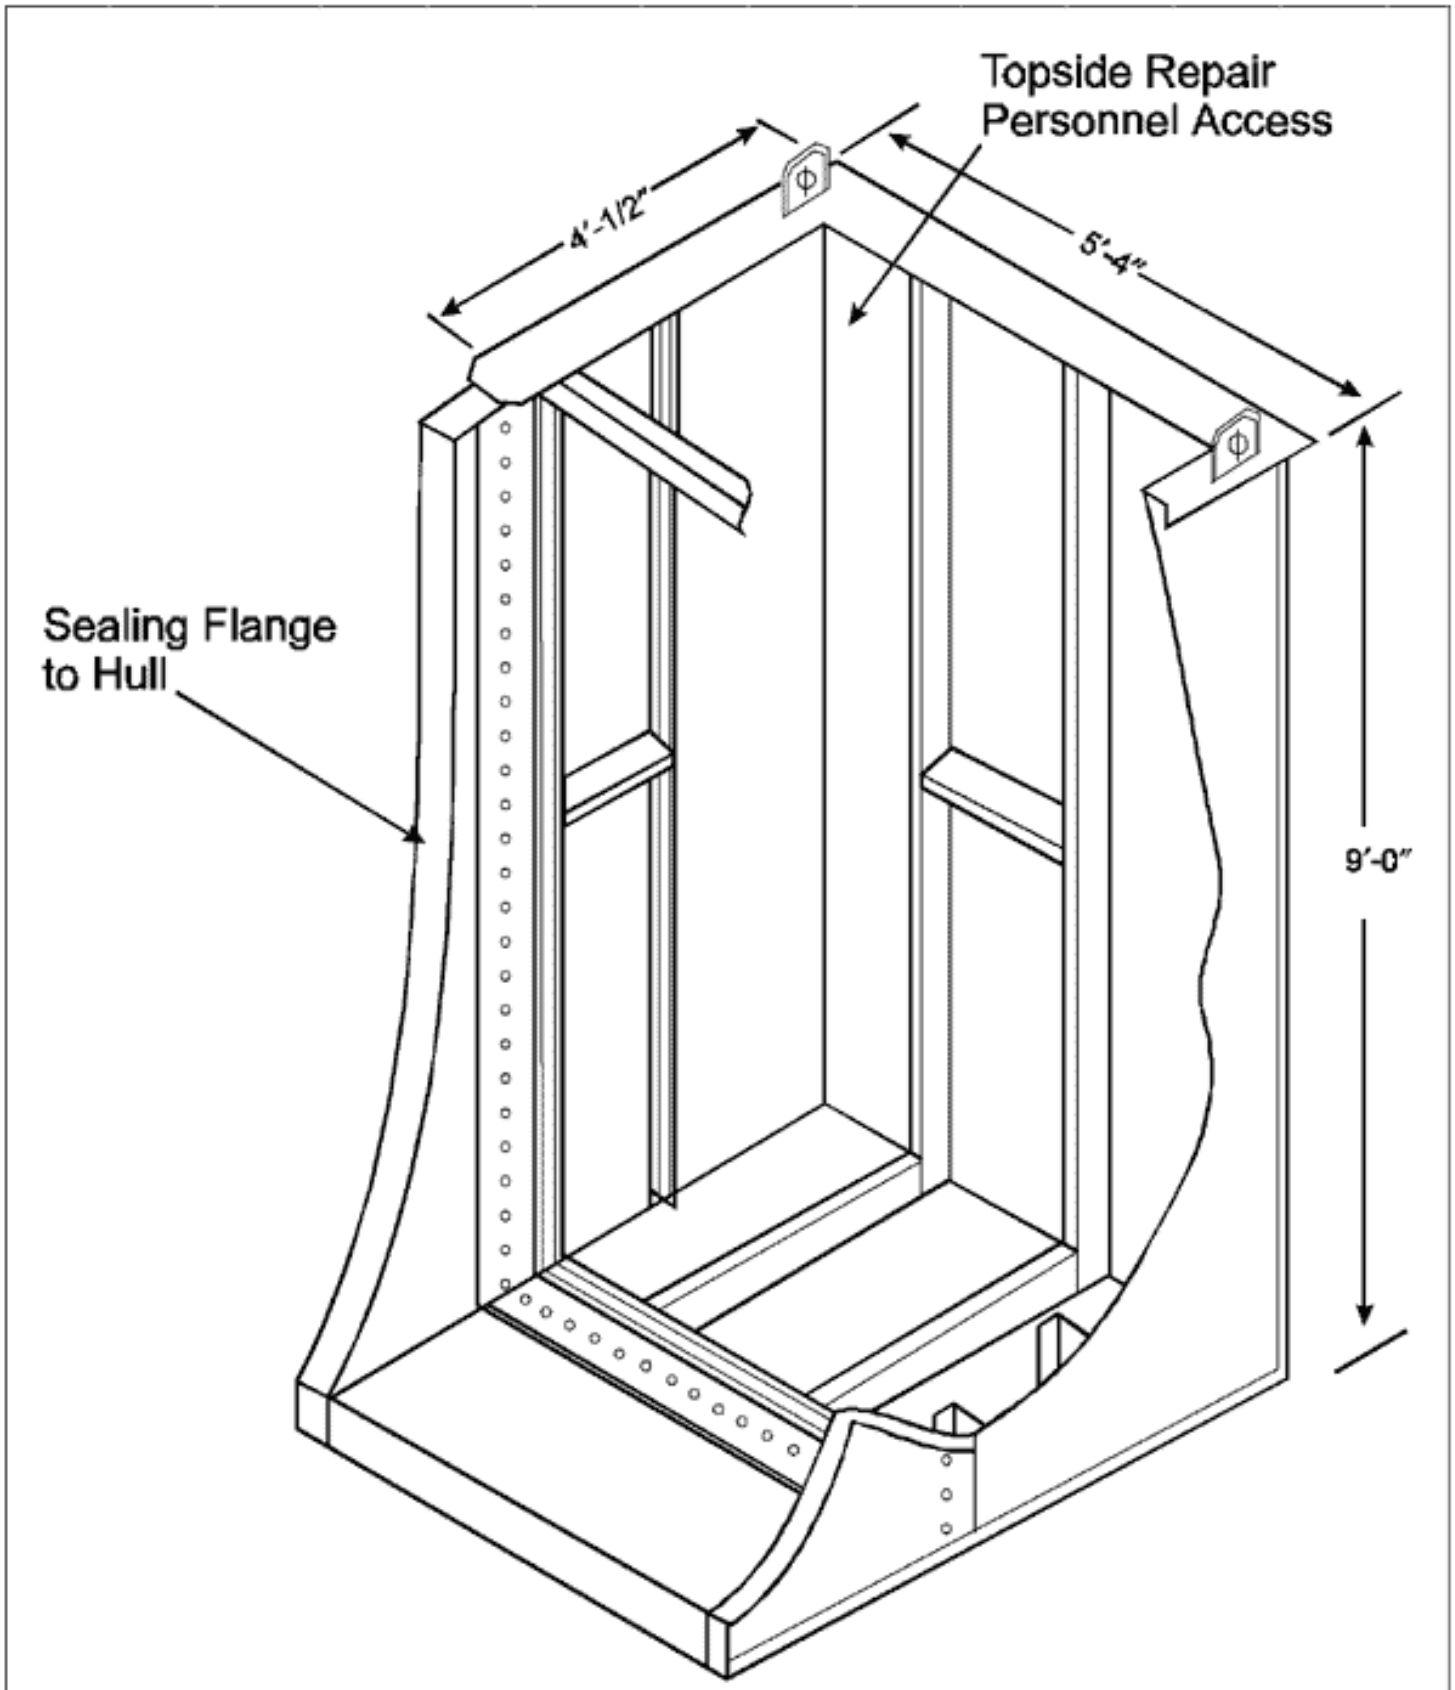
Typical Open Top Dry Chamber - FFG 7 Hull Plate Weld Repair.
